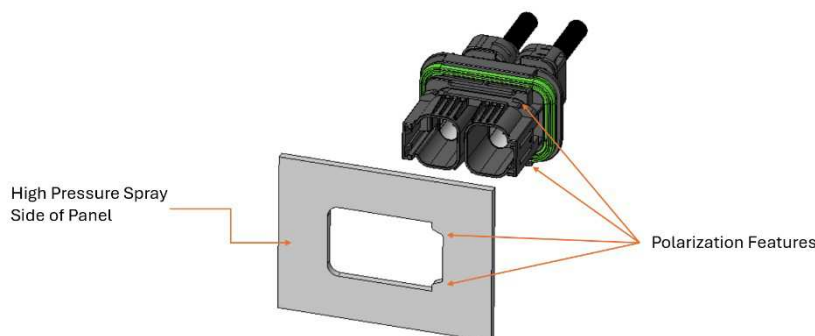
a.: Assembly of DT Highspeed 2 port Bulkhead Pin Assembly to panel
